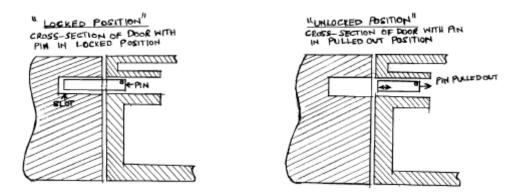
Drawing of the locking mechanism. This was given to the participants to describe the design problem, but they were allowed to modify it in their designs.
